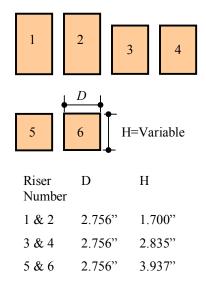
Six pieces of risers (1 in. = 25.4 mm)
